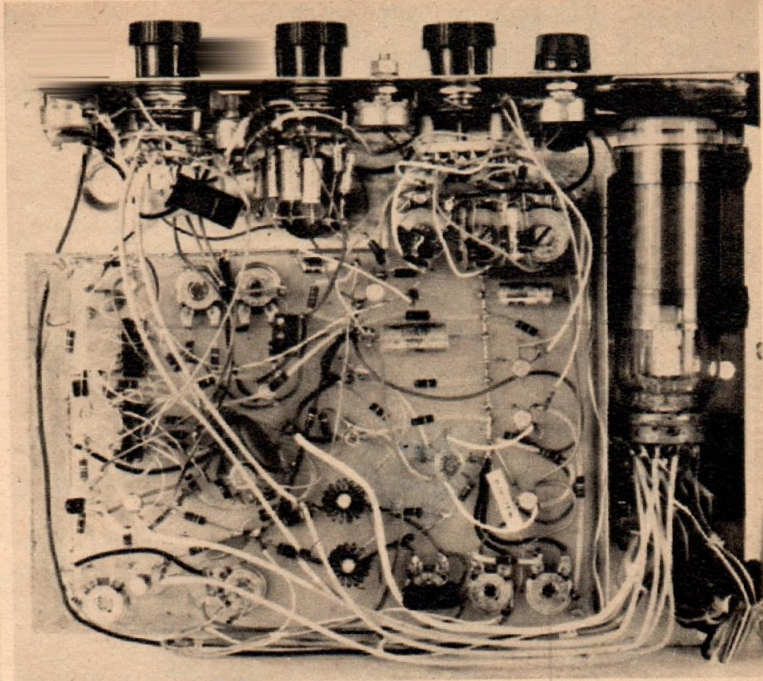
Board on which parts are mounted is  $4\frac{1}{2} \times 6\frac{1}{2}$ -in. It is mounted  $\frac{3}{8}$  in. above chassis bottom plate with spacers; mounting screws connect the ground bus to bottom plate. All pots shown here are screwdriver-adjust type. Loops around Q6 and Q7 are heat sinks. Wiring around IC2, IC3 is very tight.
